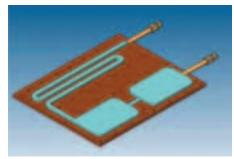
Brazed cold plate heatsink design; liquid path geometry detailed.
